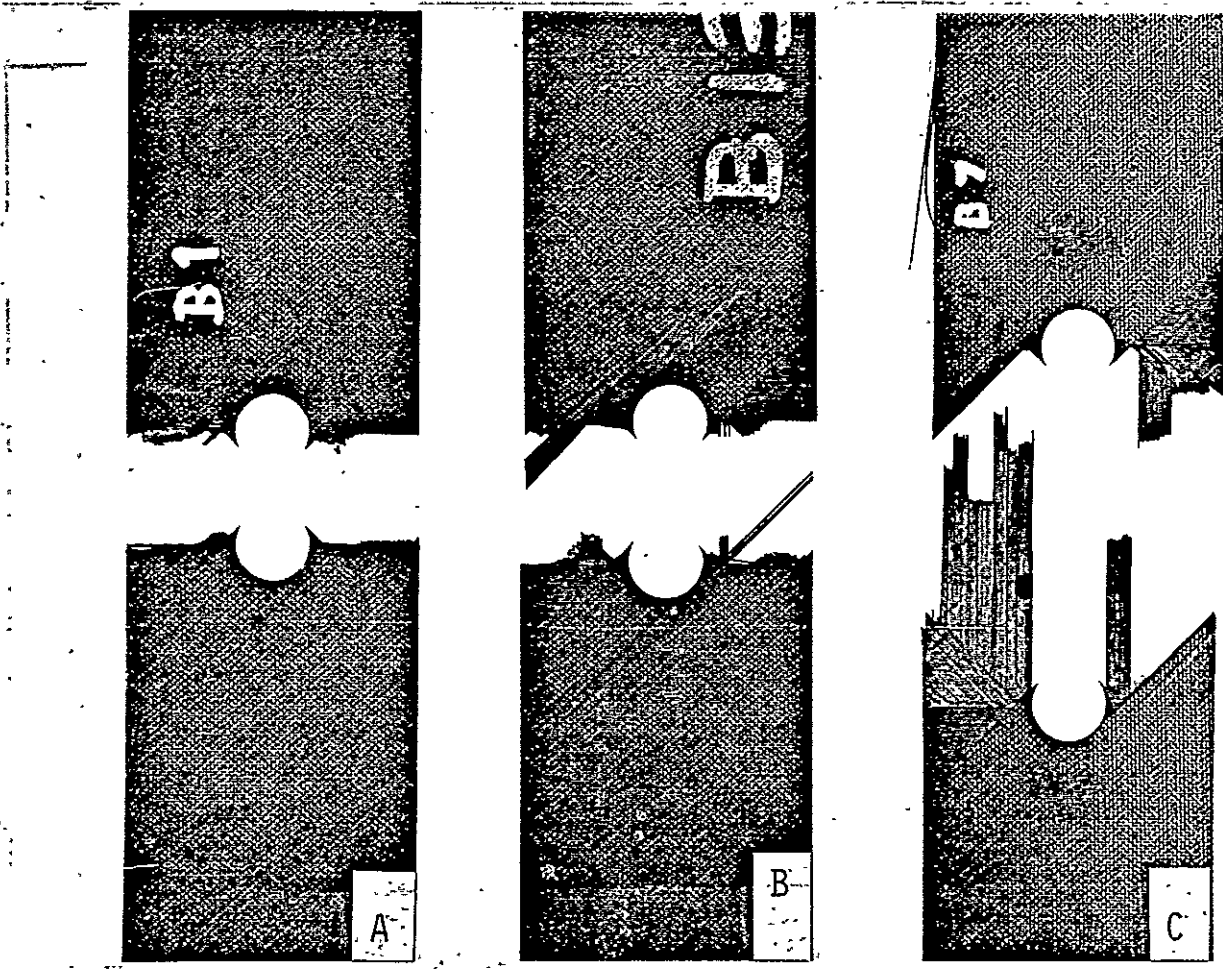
Fracture Surfaces of Type B Laminates:
